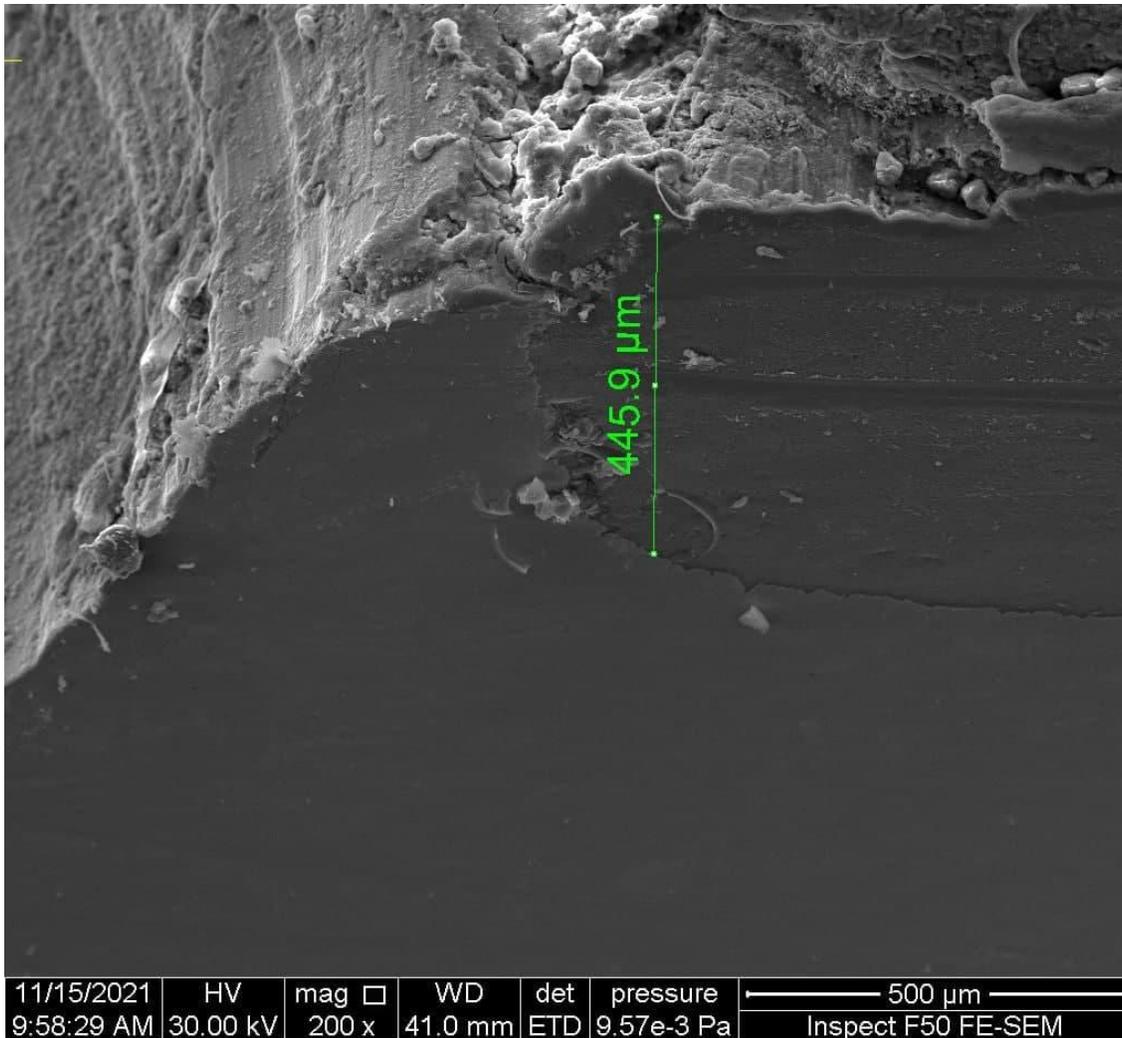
FE-SEM micrographs of the cross-section of Al to LCS welds produced using welding conditions of 1600 rpm, 3.0 s. with hook defect
